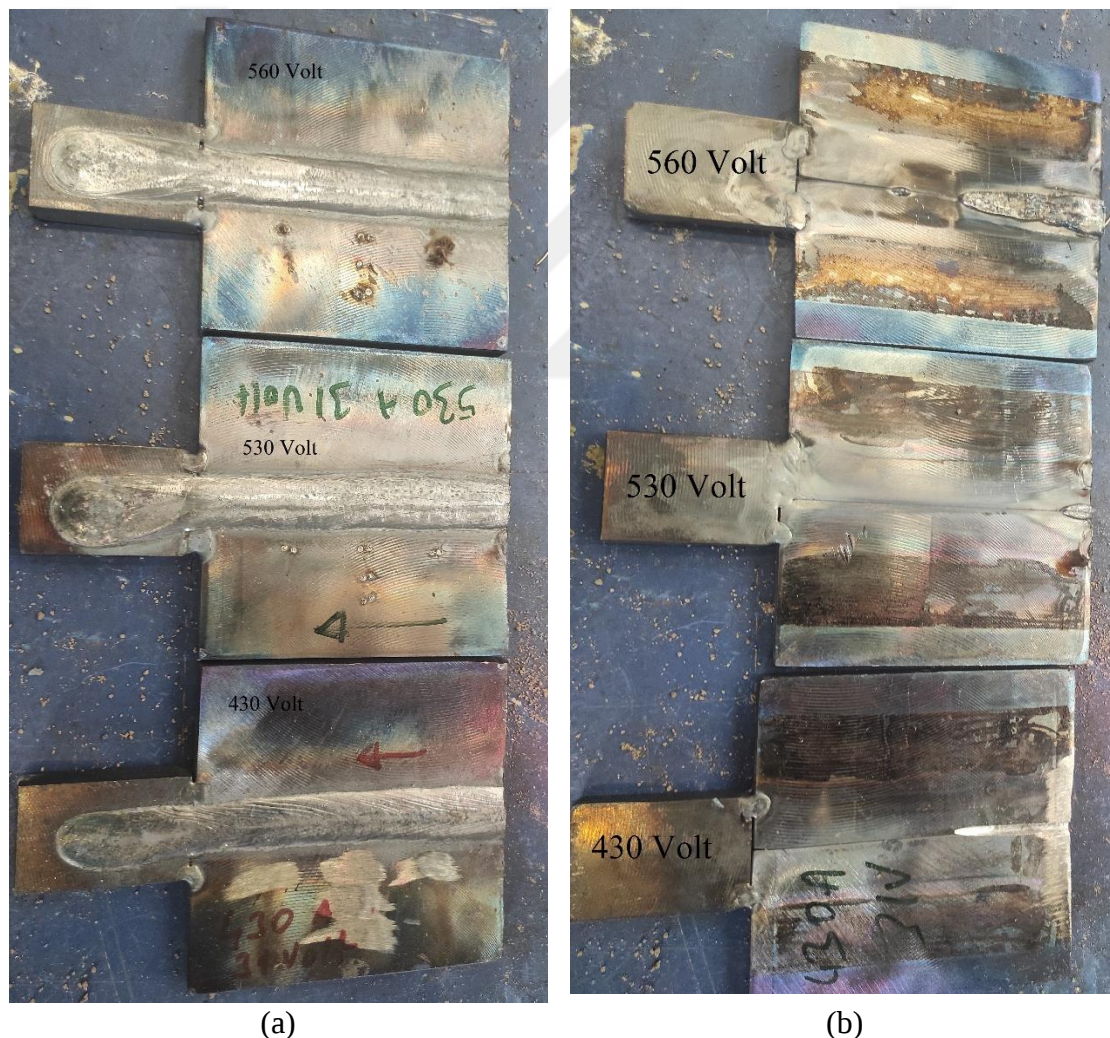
(a) The top view (b) the bottom view of specimens welded with 430 A, 530 A and 560 A respectively
